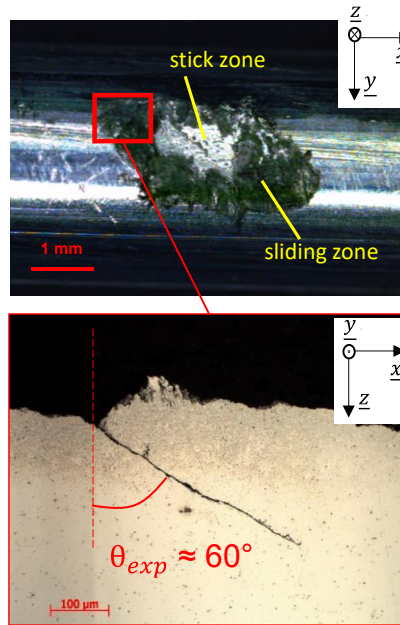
(a) Fretting Fatigue cracking: optical view of the fretting scar with a close-up cross-sectional view of the nucleated crack at the edge of the contact ($Q^ = \pm 150 \text{ N}$, $P = 300 \text{ N}$, $\sigma_{f,max} = 70 \text{ MPa}$, $R = 0.5$, $N > 10^7$ cycles).
